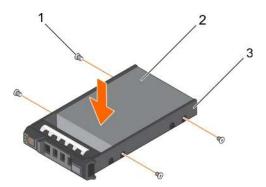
Installing a hot swappable hard drive into a hot swappable hard drive carrier
